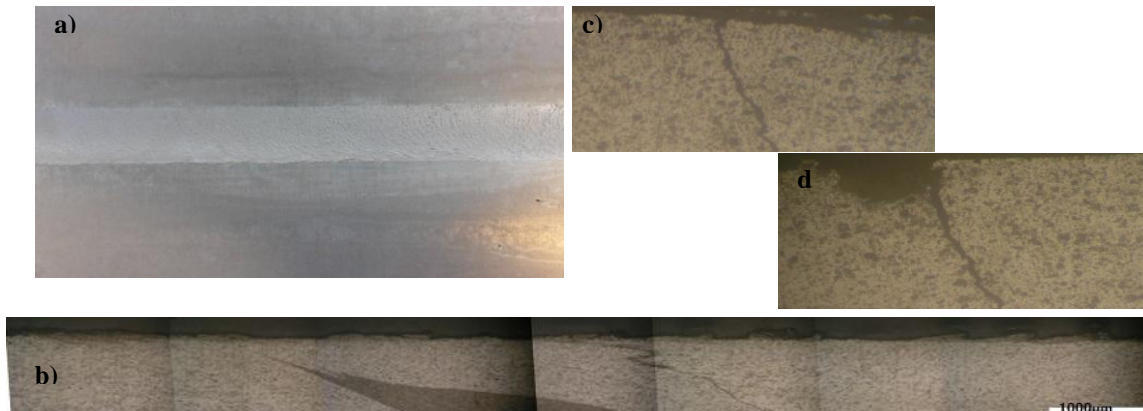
Samples submitted to corrosion testing: a) corroded plate, b) Top of the sample, c) sample with defect before corrosion testing and d) sample with defect after corrosion testing.
